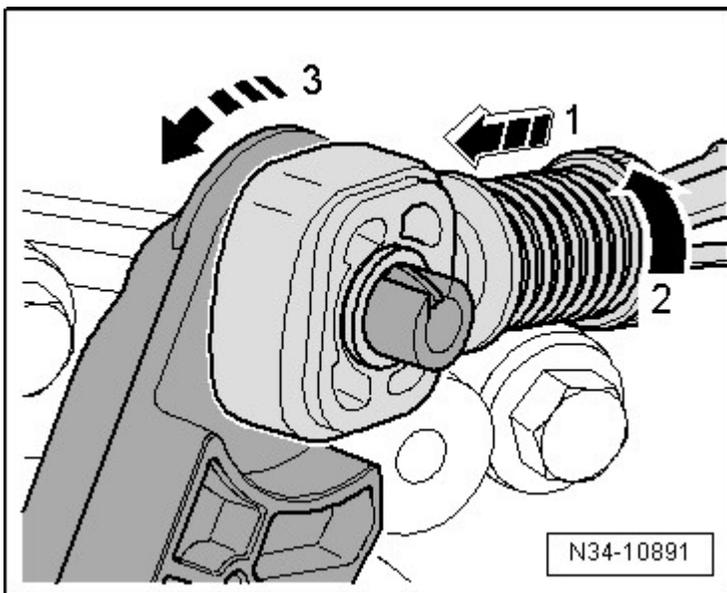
Disconnecting Cable Retainer From Selector Cable
